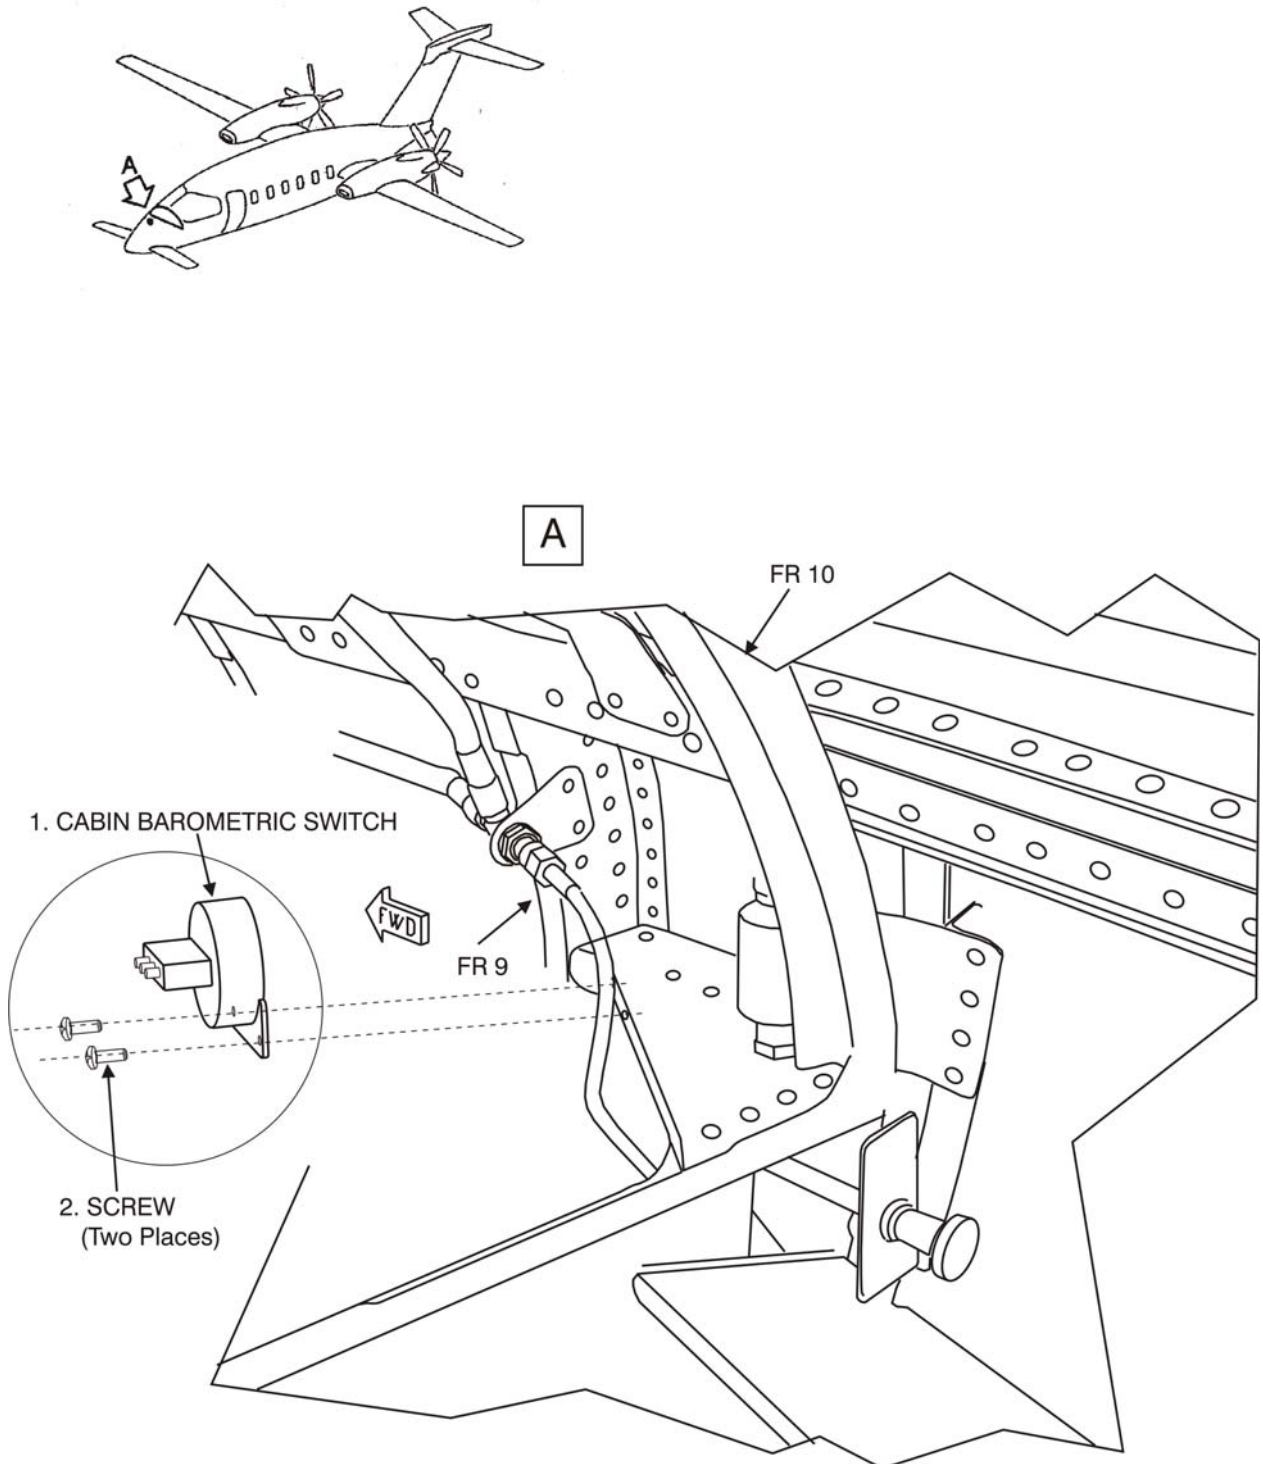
Cabin Barometric Switch - Removal / Installation
